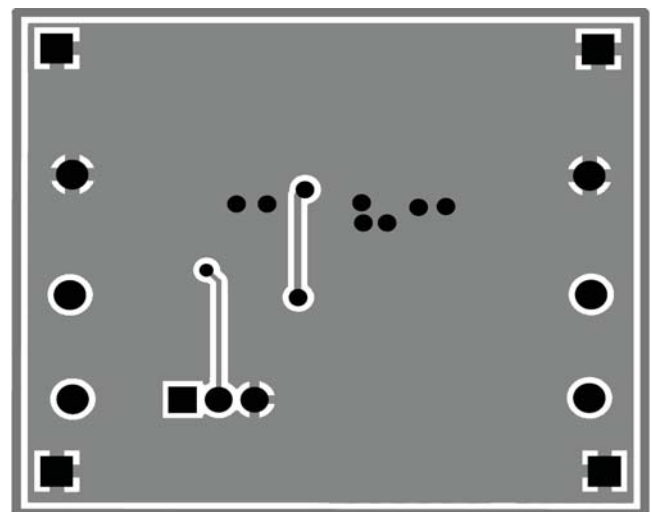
AAT4687-1 Evaluation Board Solder Side Layout.
